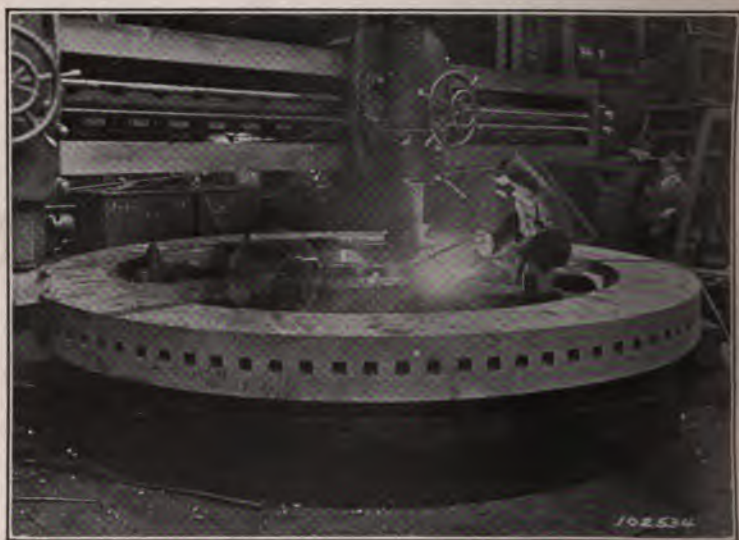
Repairing steel casting by electric arc welding, without removing casting from machine tool.
